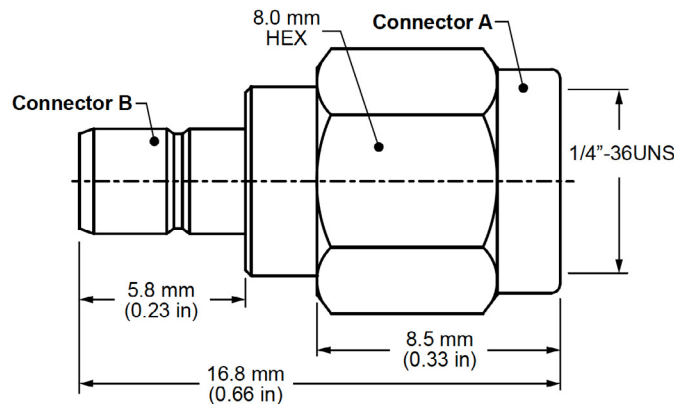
Product Dimensions for the ADP-SMAM-SMBF-G Adapter
